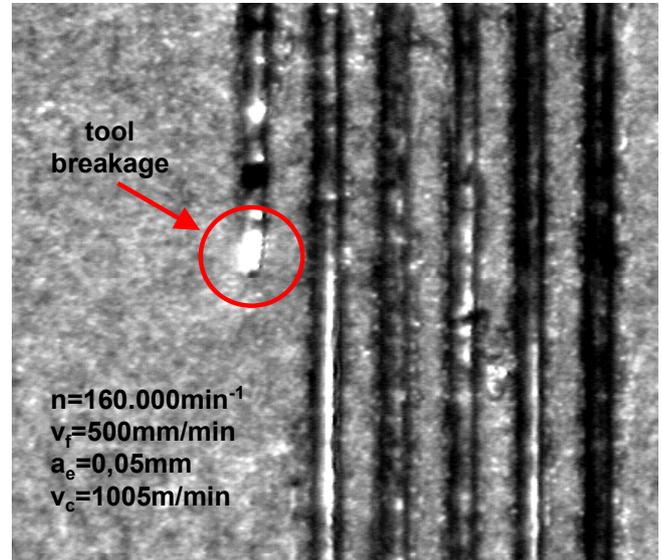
Grooves in stainless steel (1.4301) produced with a diamond micro side milling cutter
